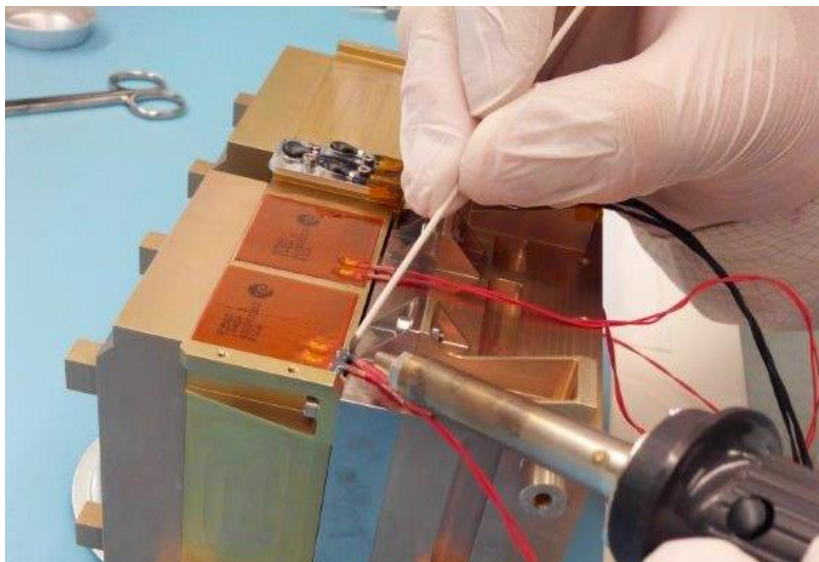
Gluing with 3M Scotch Weld on EPT-HET
